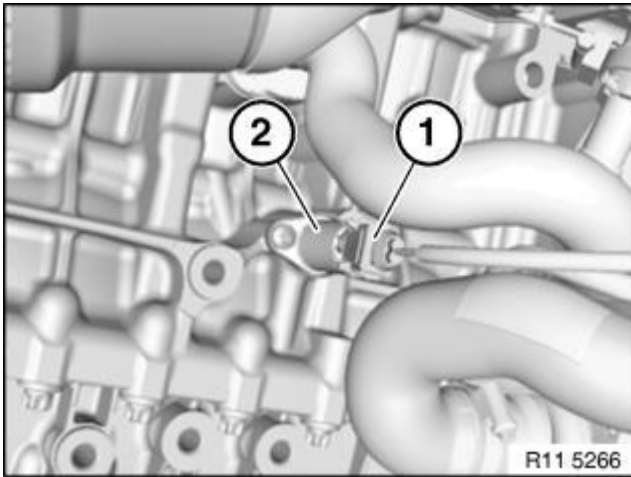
Detach Plug (1) From Hydraulic Valve (2)
